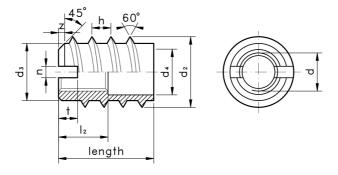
Threaded Insert for Wood Type B to DIN 7965
